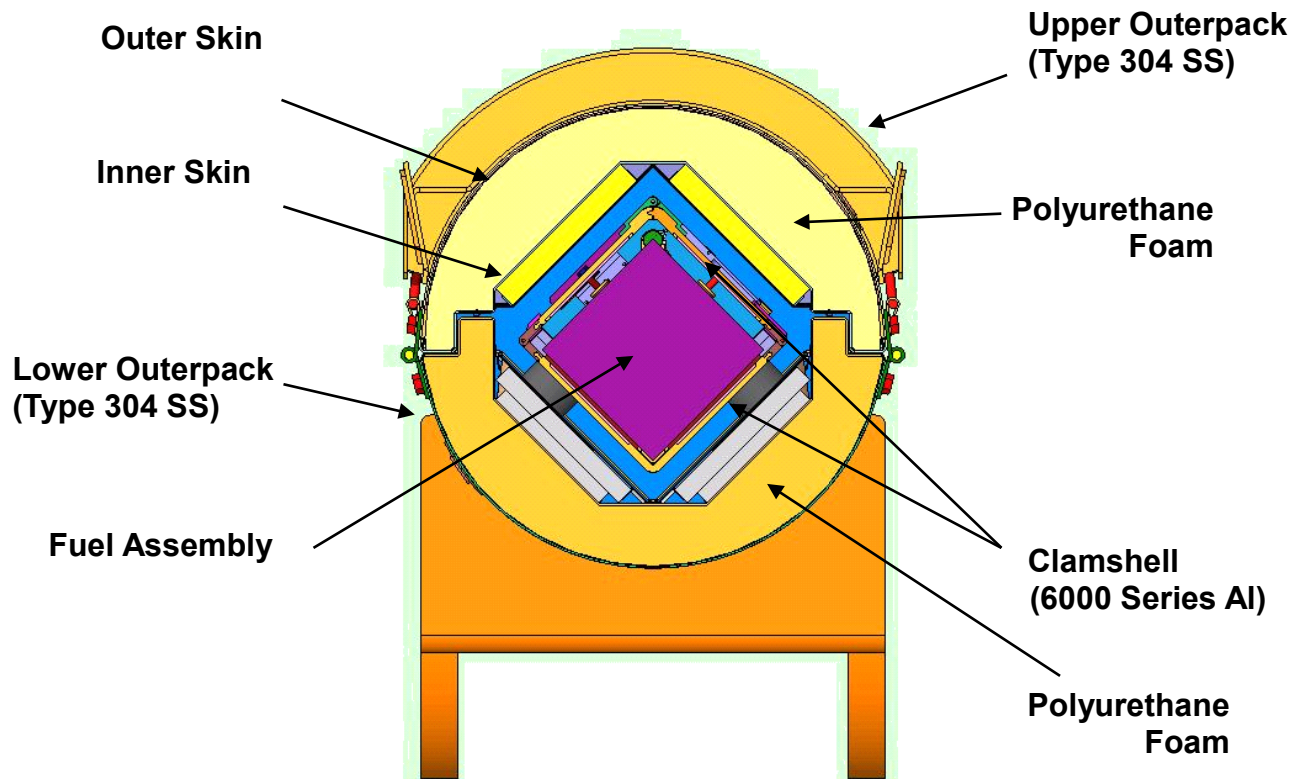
Traveller Cross-Section and Primary Construction Constituents
